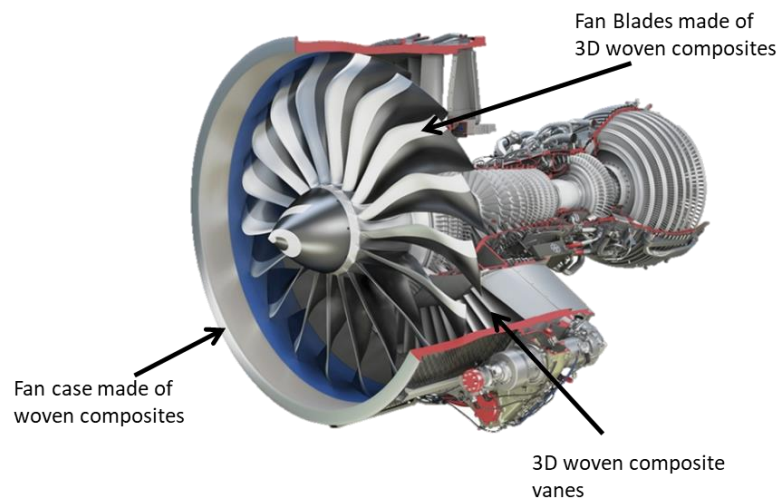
8 LEAP engine parts equipped with 3D woven composites [27].
